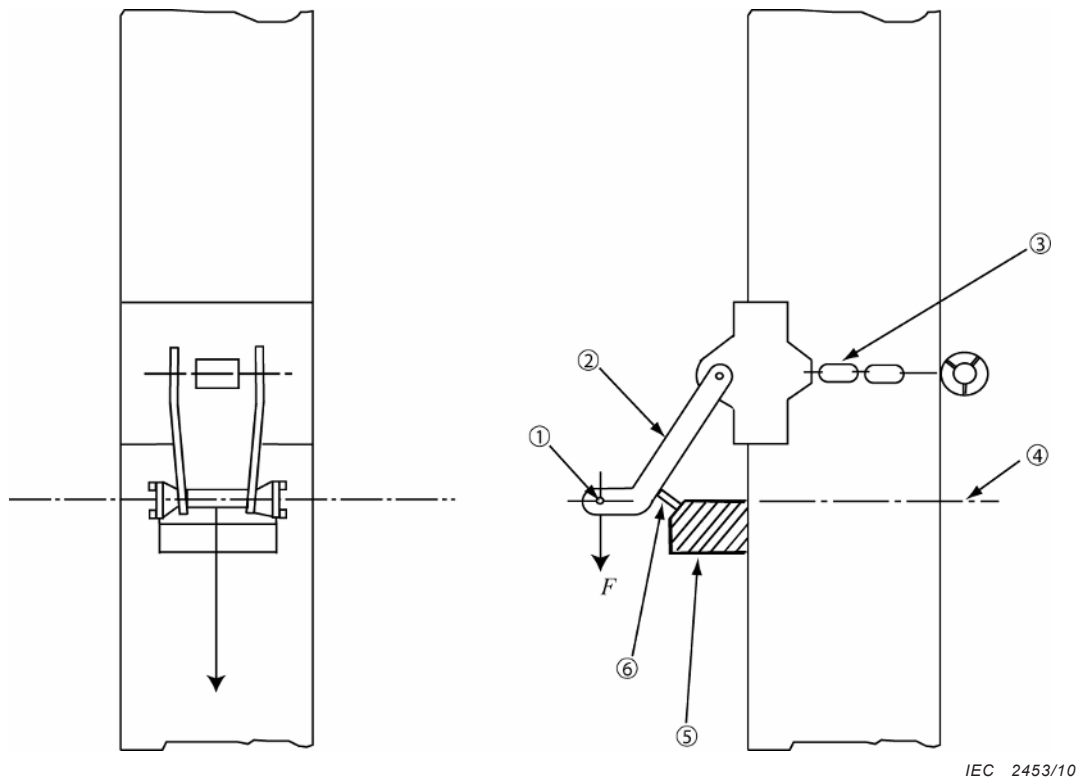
Ring saddle with chain bracket – tensile test5.5.2.4.2 Additional tests for ring saddles with chain bracket
